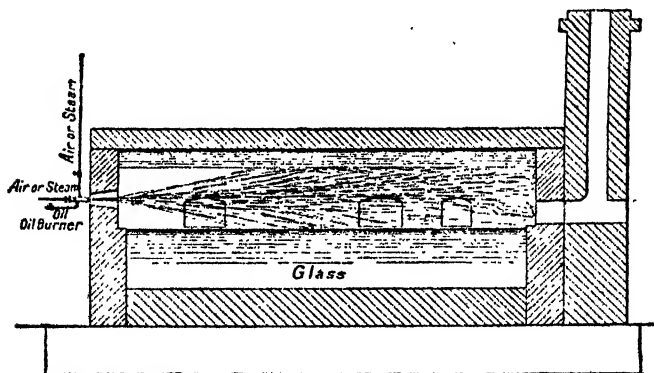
Six-ton open-hearth glass furnace and arrangement of Carbogen fuel-oil burners.
